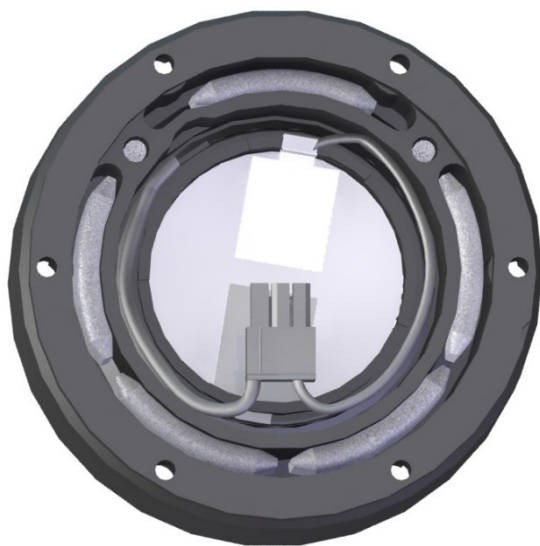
Location of Desiccant in Transducer Housing Assembly
